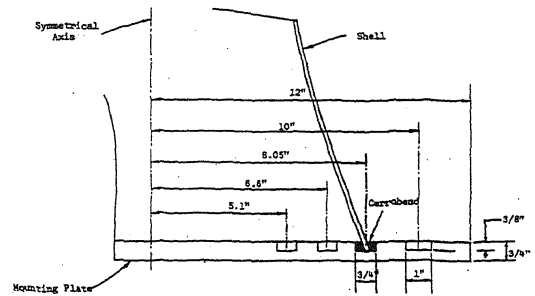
DETAIL OF SHELL SPECIMEN CLAMPED MOUNTING
